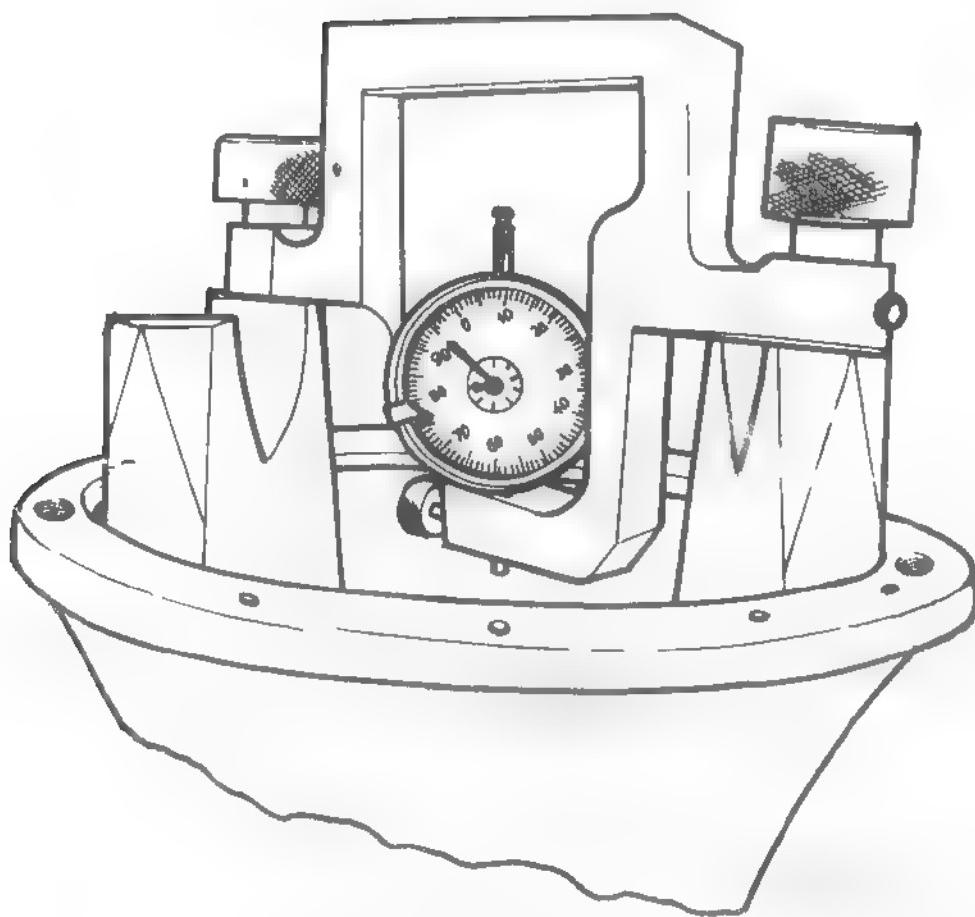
ESTABLISHING DRIVE PINION AXIAL PLAY,
